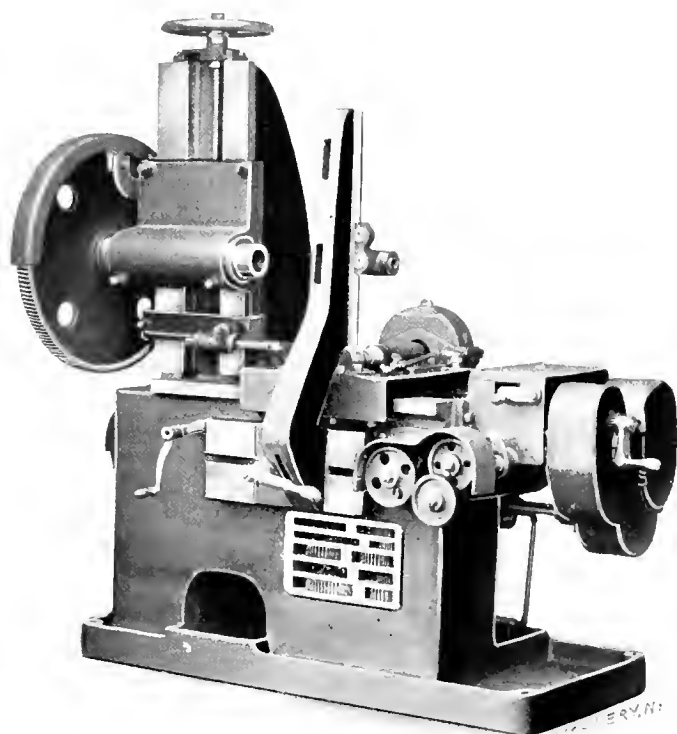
Automatic Gear-cutting Machine made by Cincinnati Shaper Co
